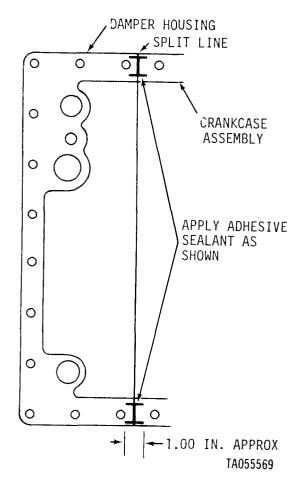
Bottom flange of damper housing and crankcase showing sealant application.
